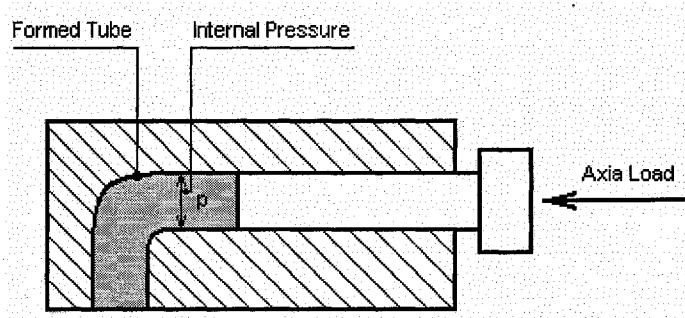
Symbolic representation of tube push-bending (after forming)
